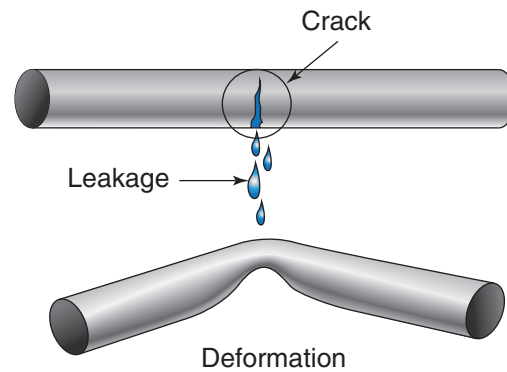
Steel tubing should be inspected for leaks, kinks, and deformation.
